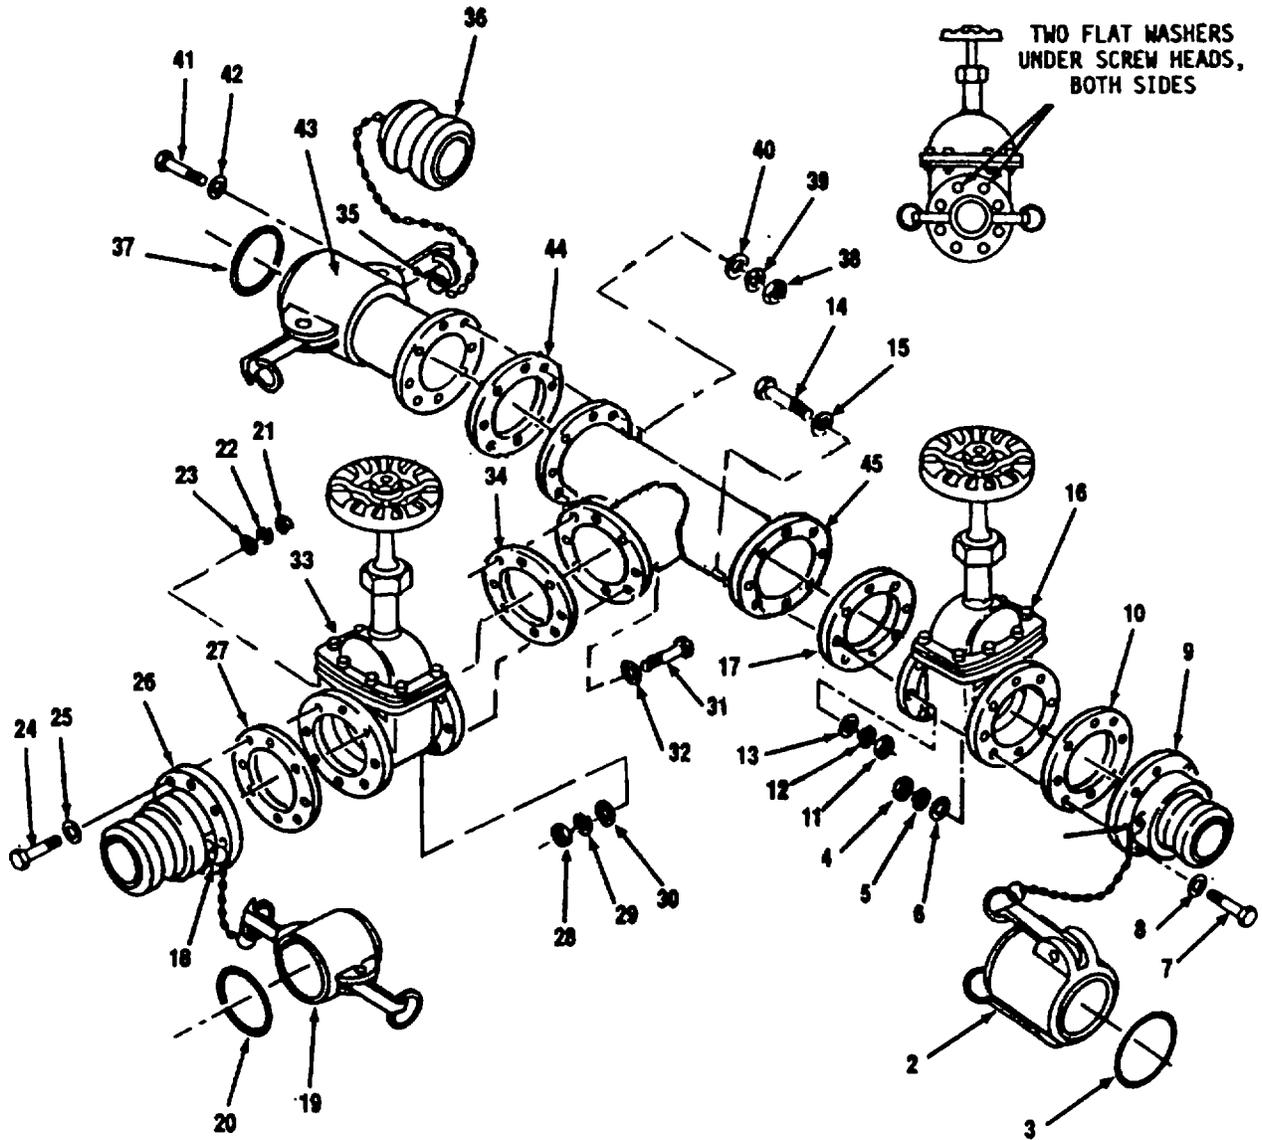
Tee and Dual Gate Valve Assembly (9148-Y2) Disassembly
